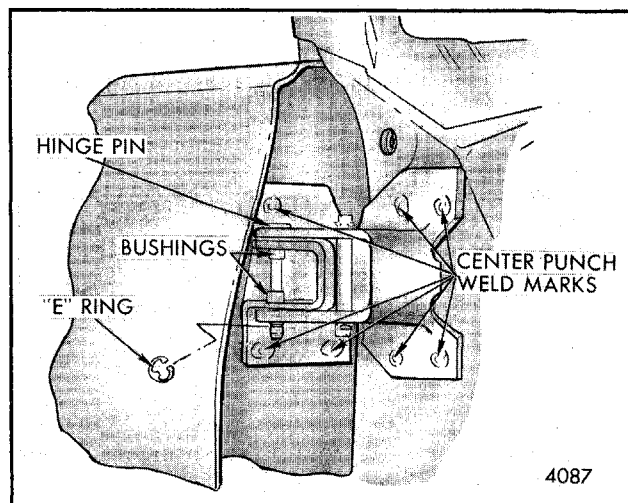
Front Door Hinge "E" Ring Removal - "X" Styles
